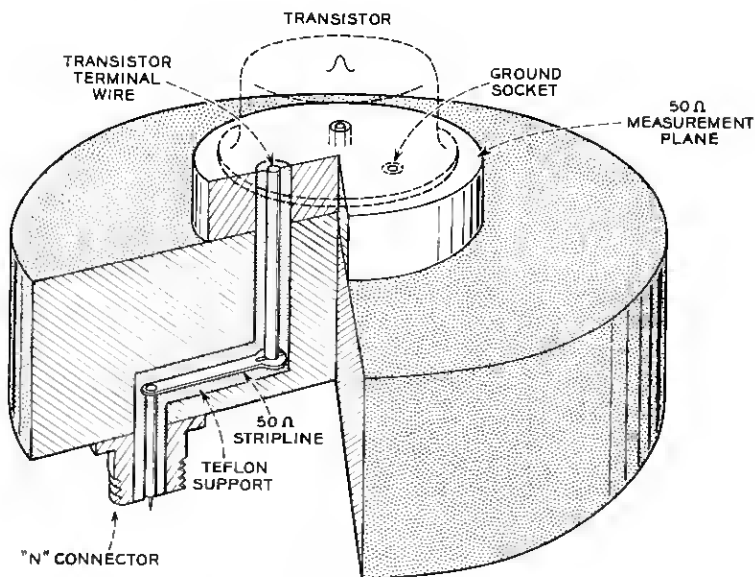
Sectional view through actual transistor test jig, showing how 50-ohm transmission geometry is preserved.
